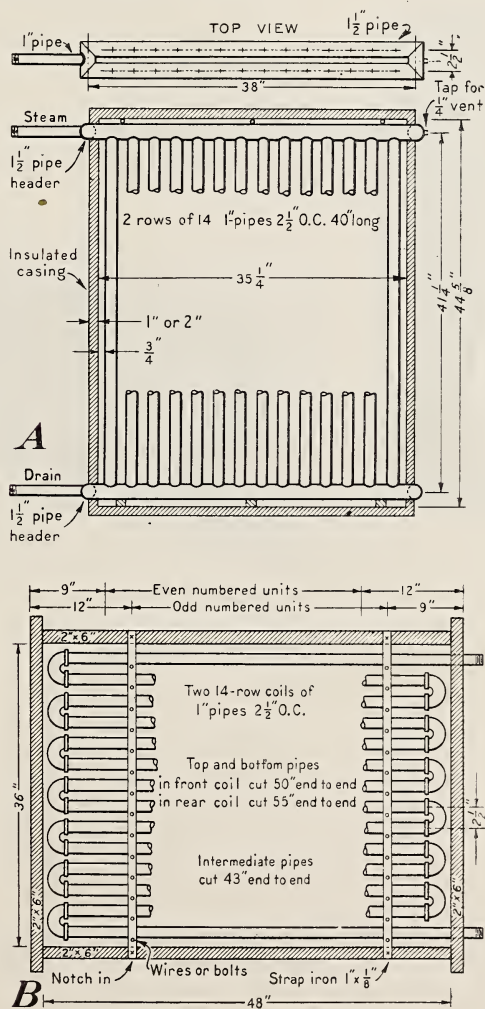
Iron-pipe heaters: A, Welded iron-pipe unit; B, return-bend iron-pipe unit. The top and sides of the insulated casing are built on the heater after the units are assembled.
